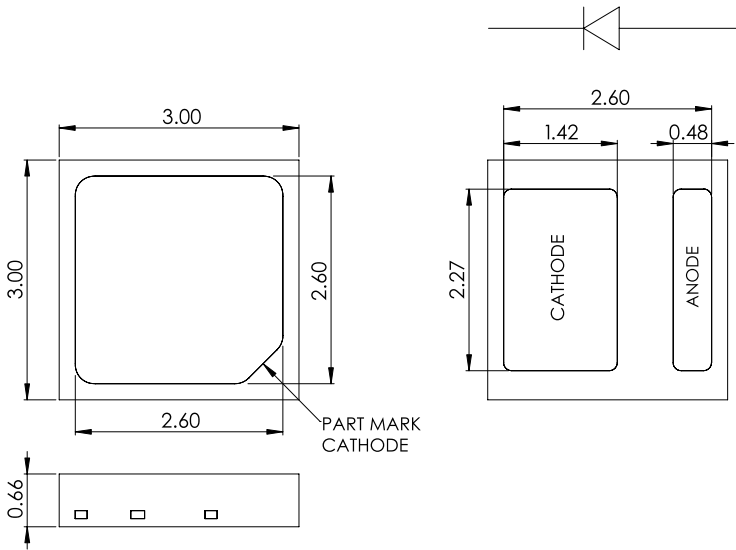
Mechanical dimensions for LUXEON 3030 HE.
